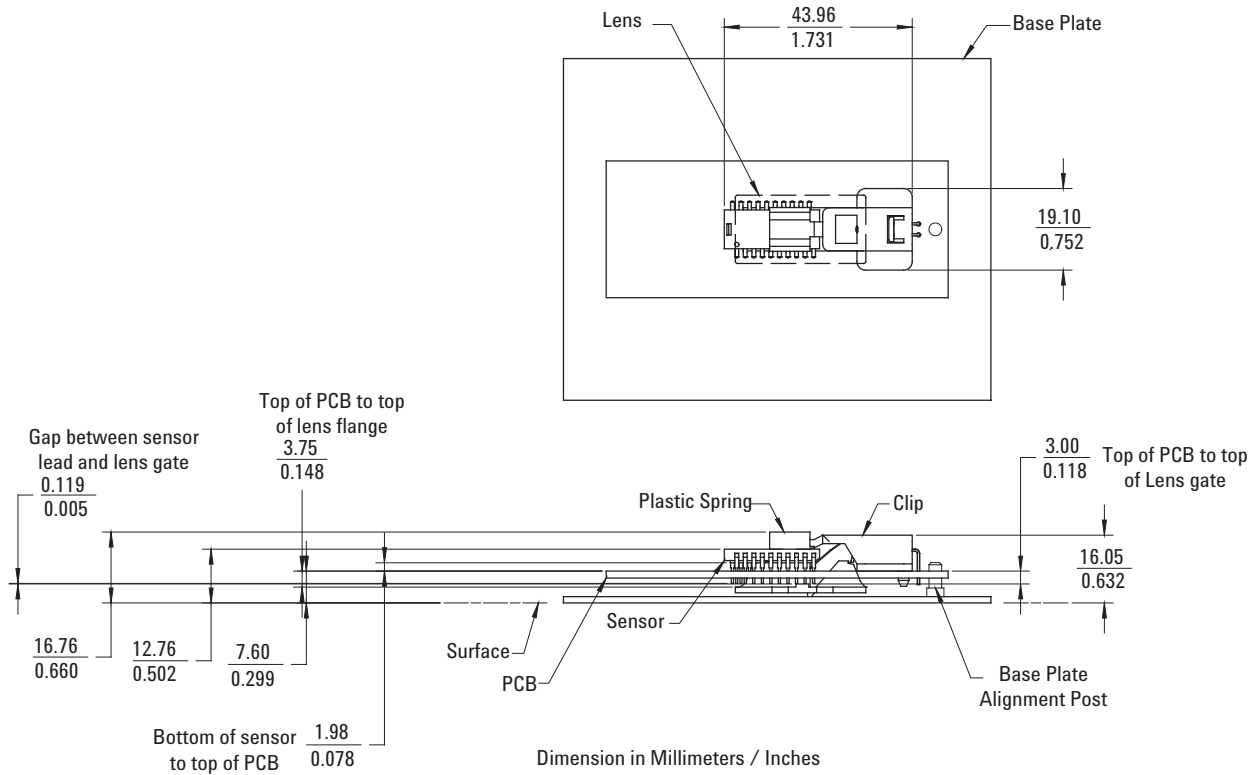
2D Assembly drawing of ADNS-3040 (top and side view)
